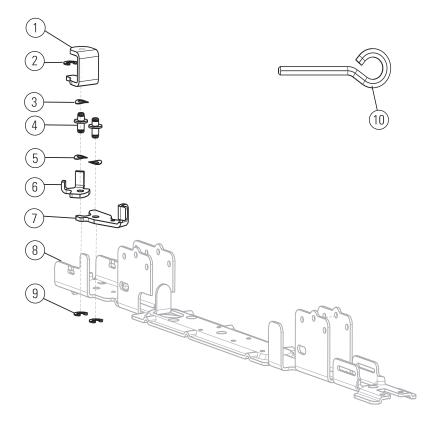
Sub-bracket assembly for hex and cylinder dogging units only.
